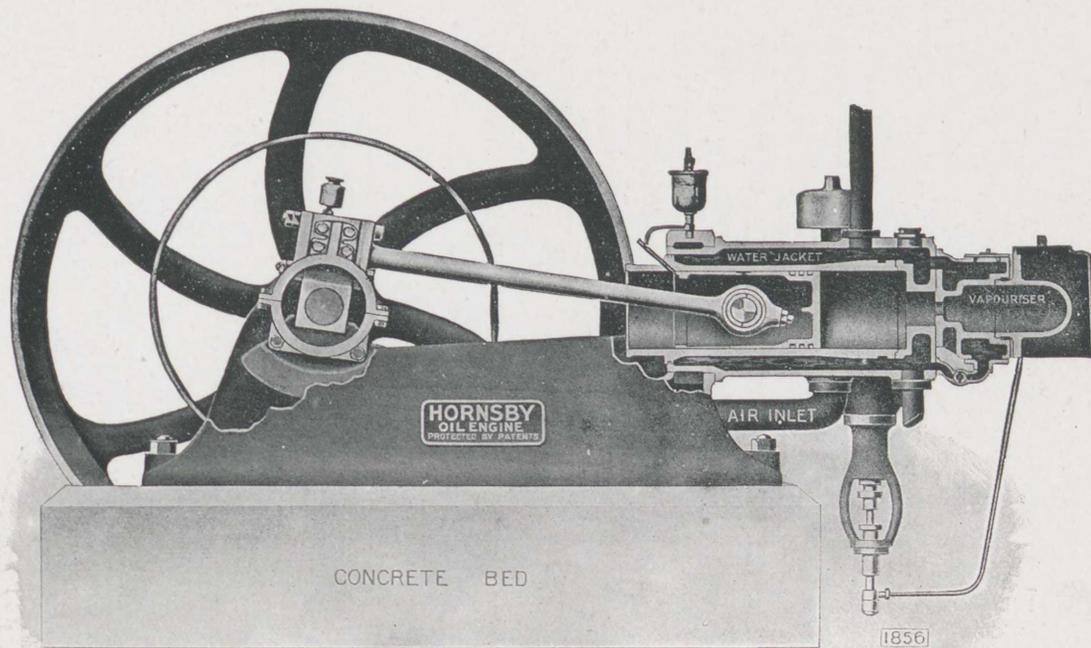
Section of Hornsby-Ackroyd Oil Engine
